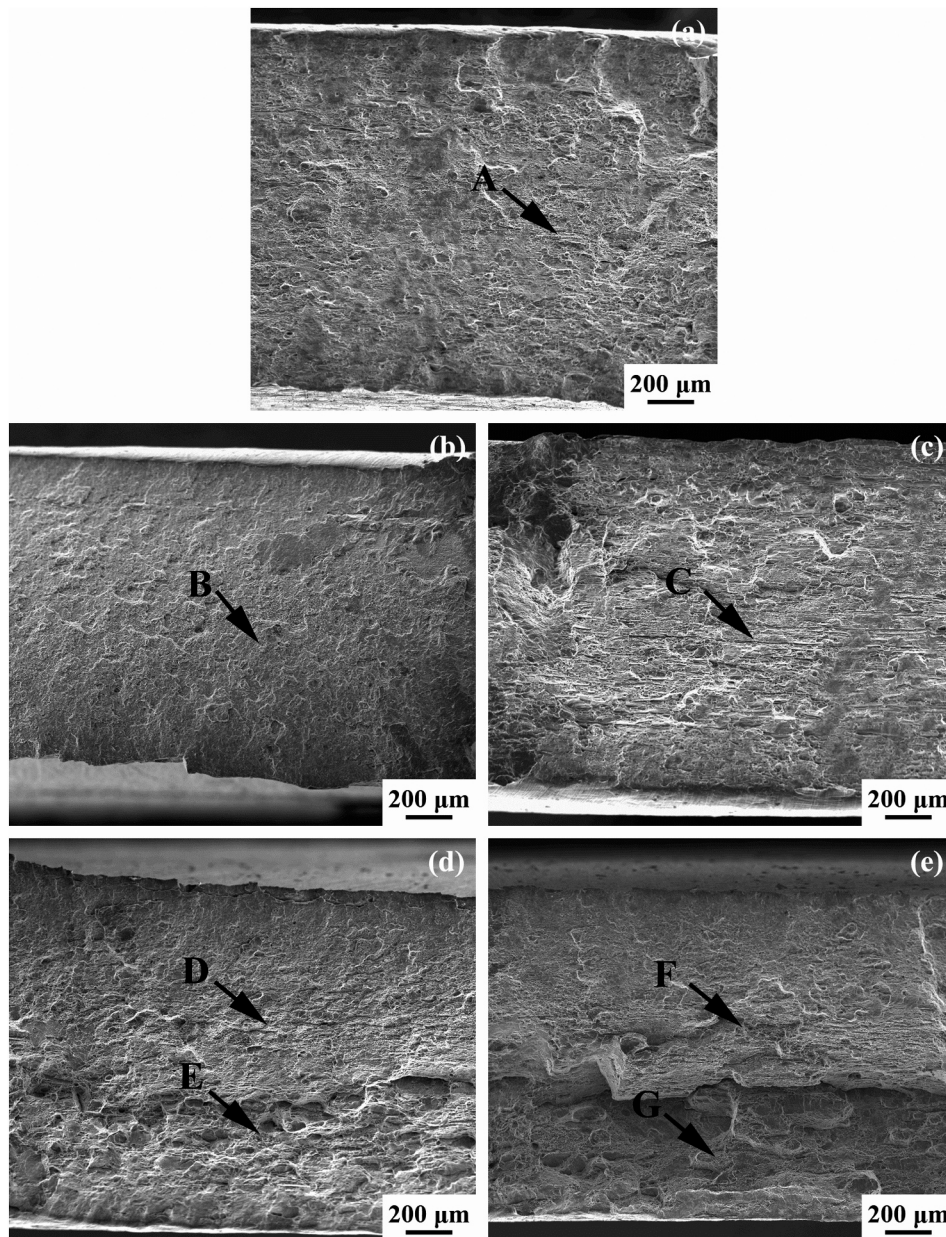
Macrographic fractographs of FSW 2060-T8 joints: (a) BM; (b) 400-200, (c) 1200-50, (d) 800-200, and (e) 1200-200.
